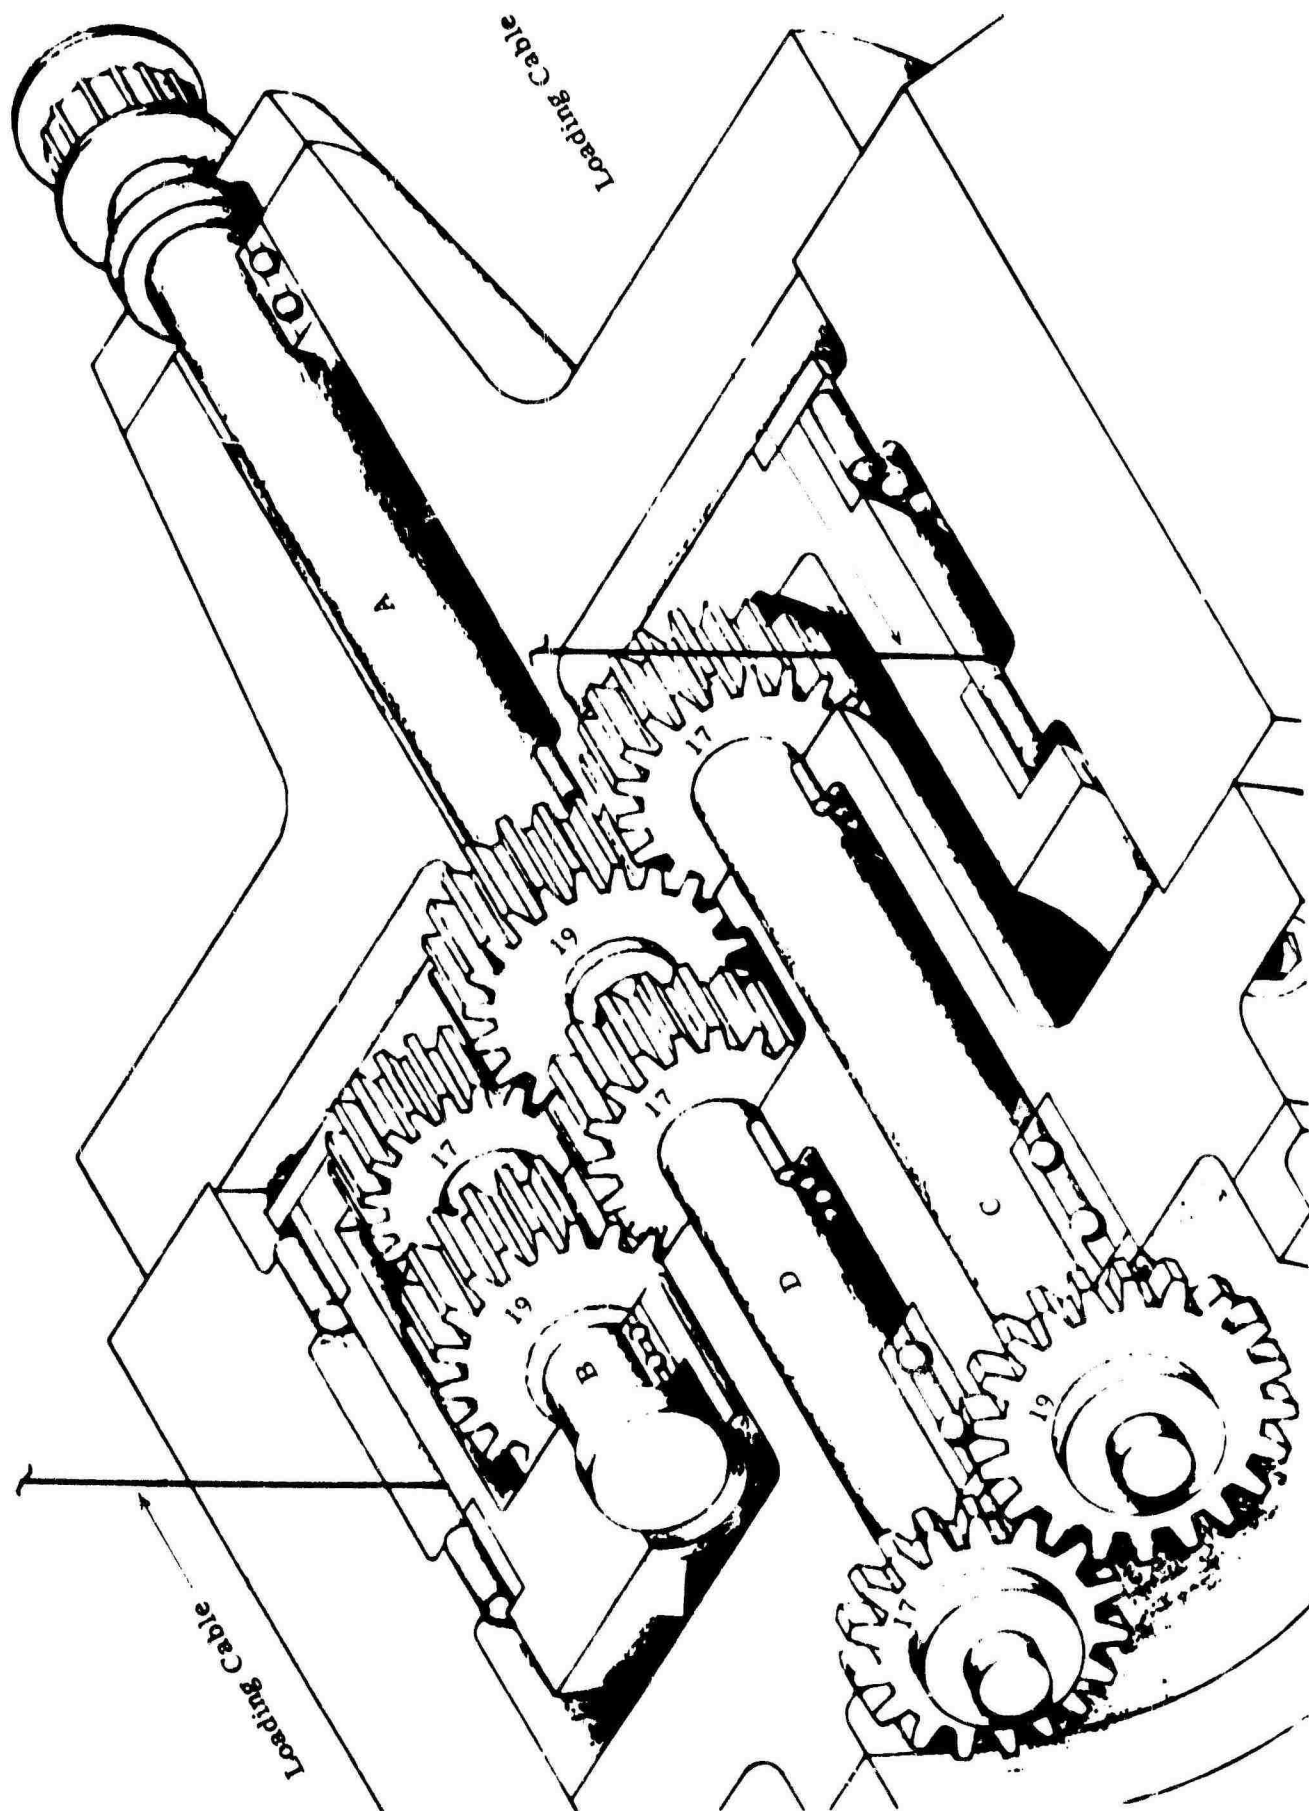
SECTION VIEW HIGH SPEED SPUR GEAR MACHINE
